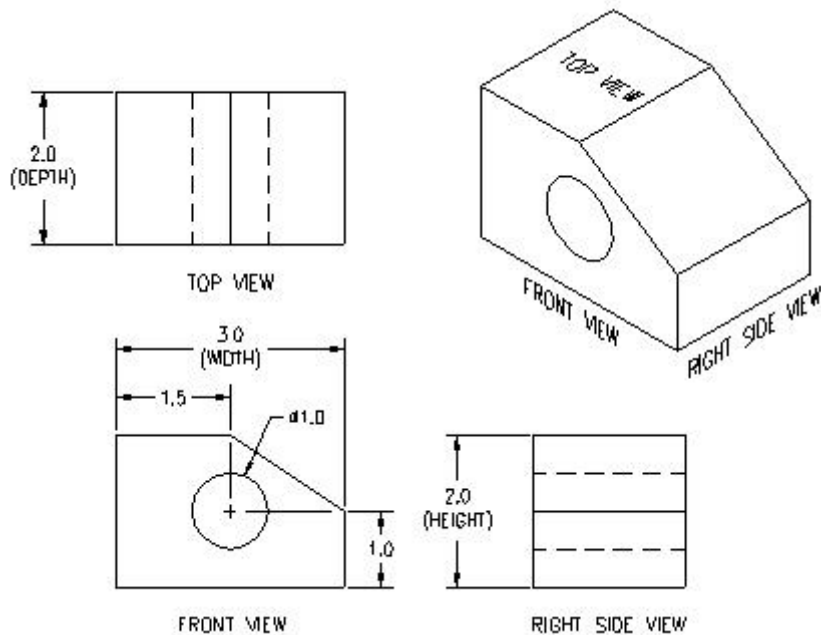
The most common views in an engineering drawing are front, top and side orthographic views and an isometric view.
